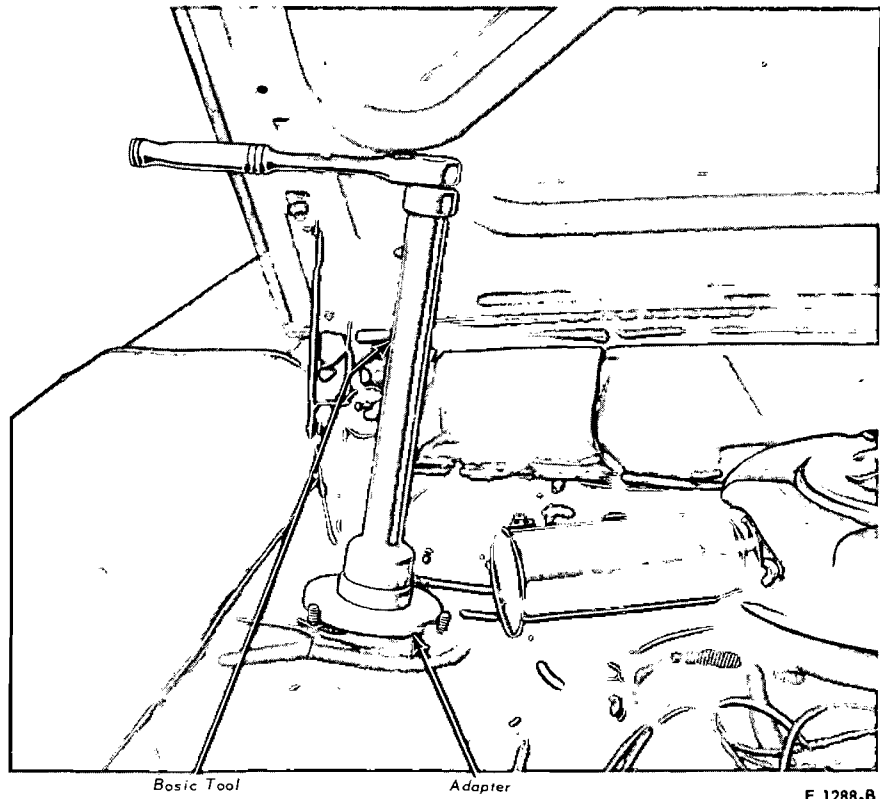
Spring Compressor Tool Installed—Upper View—Typical
